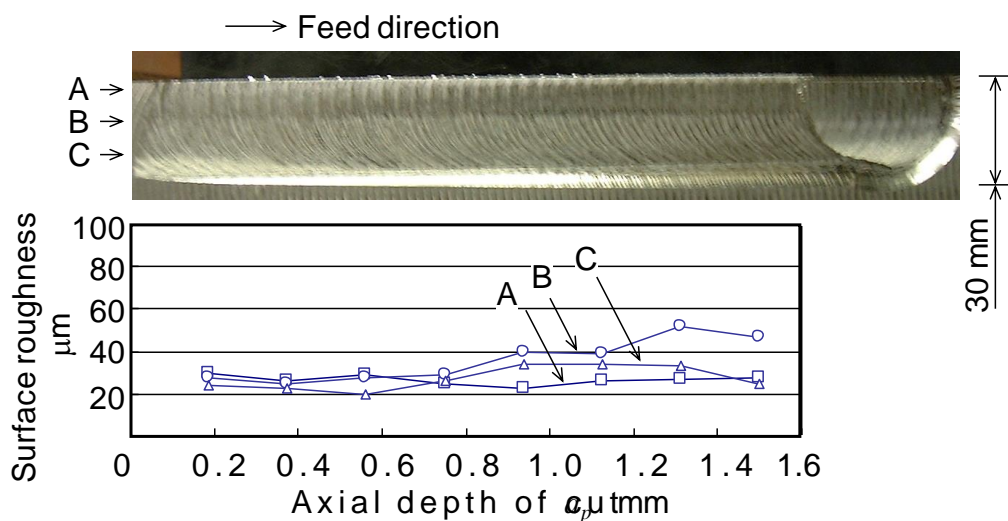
45 Surface roughness of work piece machined with the prototyped damped tool arbor.
